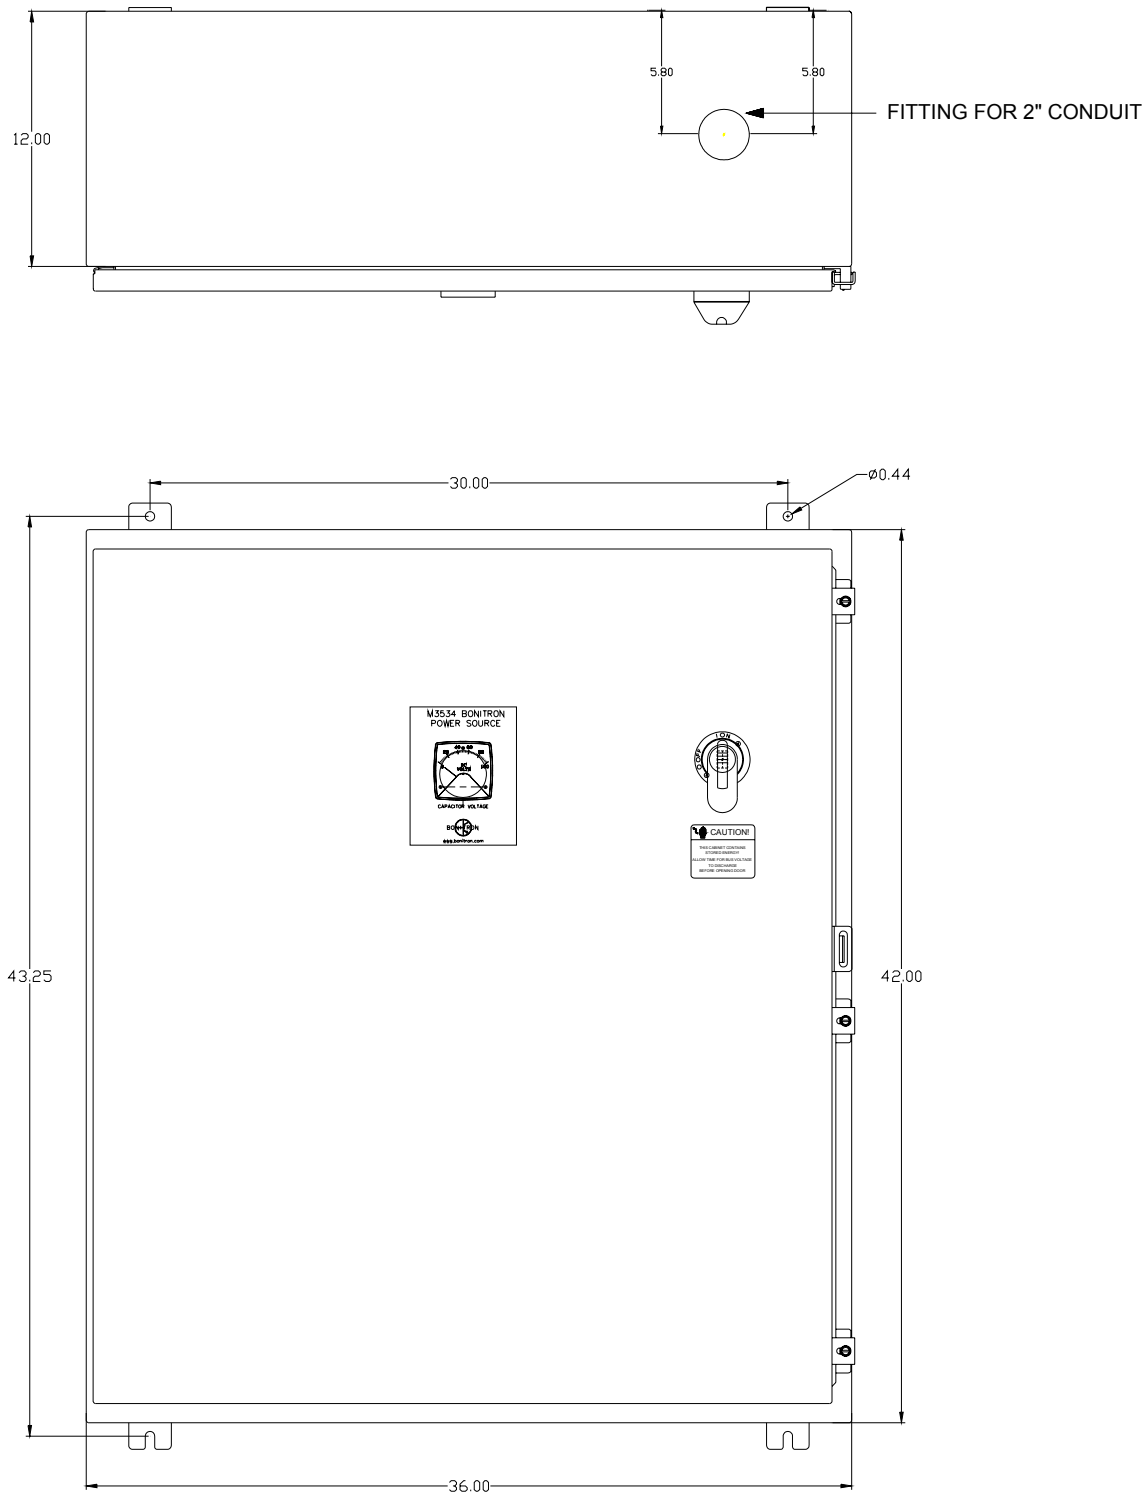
M3534RT Control Module ‘A5’ Chassis Dimensional Outline
